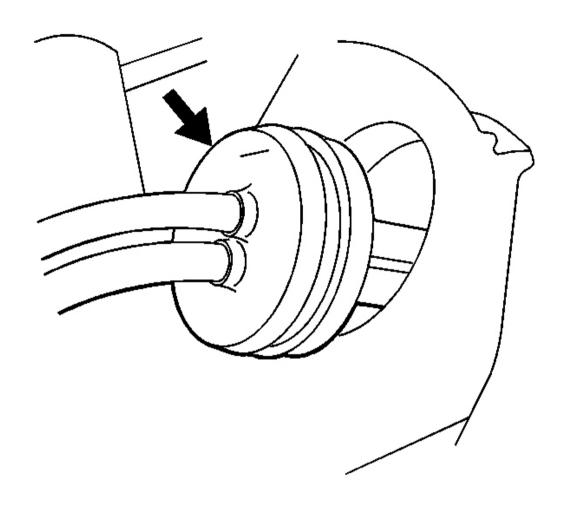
Shift Cable Pass-Through Grommet Courtesy of GENERAL MOTORS CORP.
